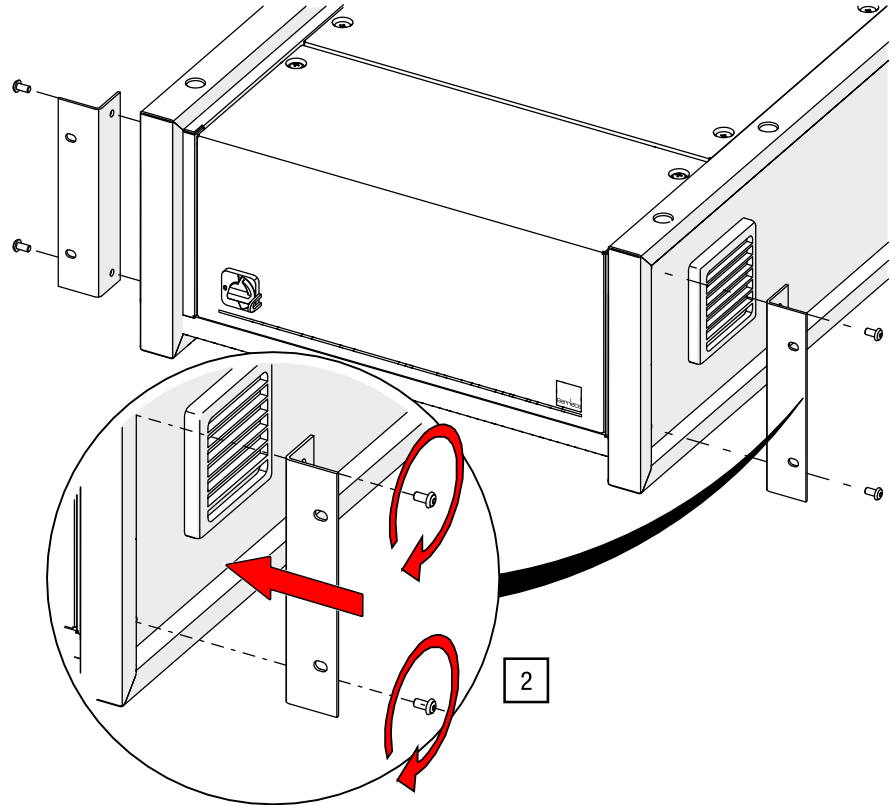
Screw on the rack mounting bracket (control unit model may vary)
